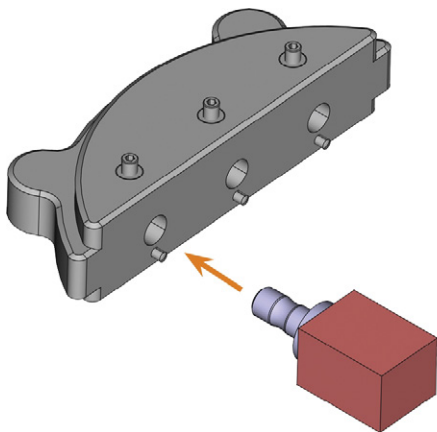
INSERTING A BLOCK INTO THE BLOCK HOLDER
